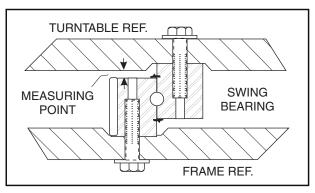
Swing Bearing Tolerance Measuring Point
